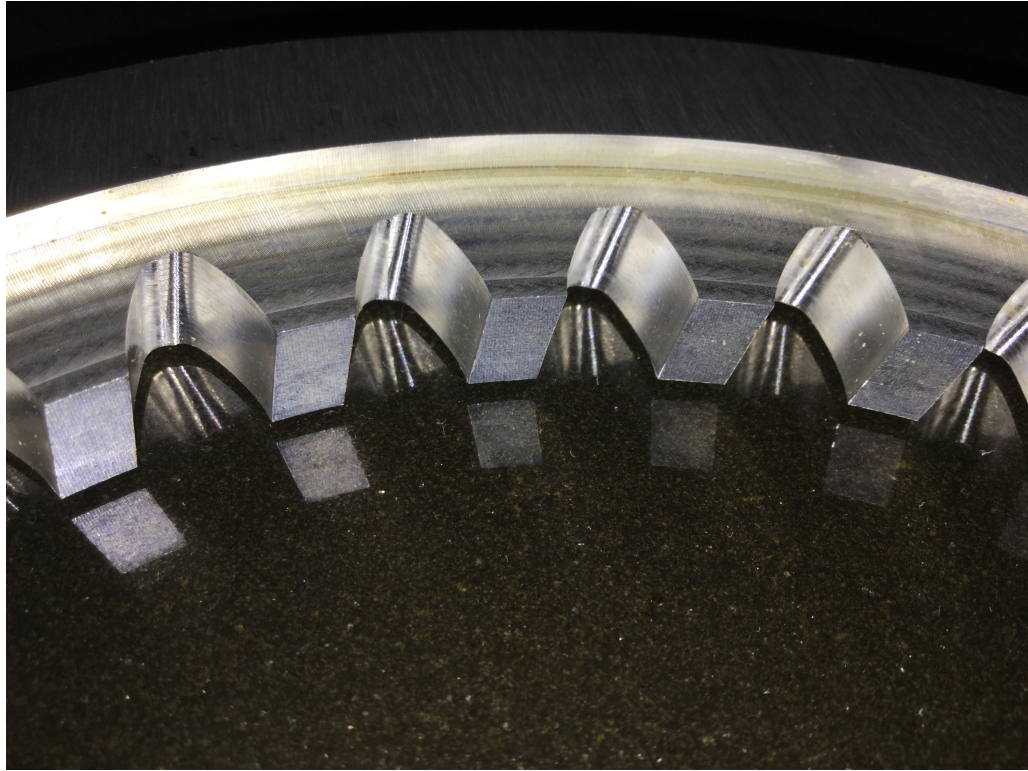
Close Up View of Teeth of a Machined Internal Helical Gear with -10° Helix Angle
